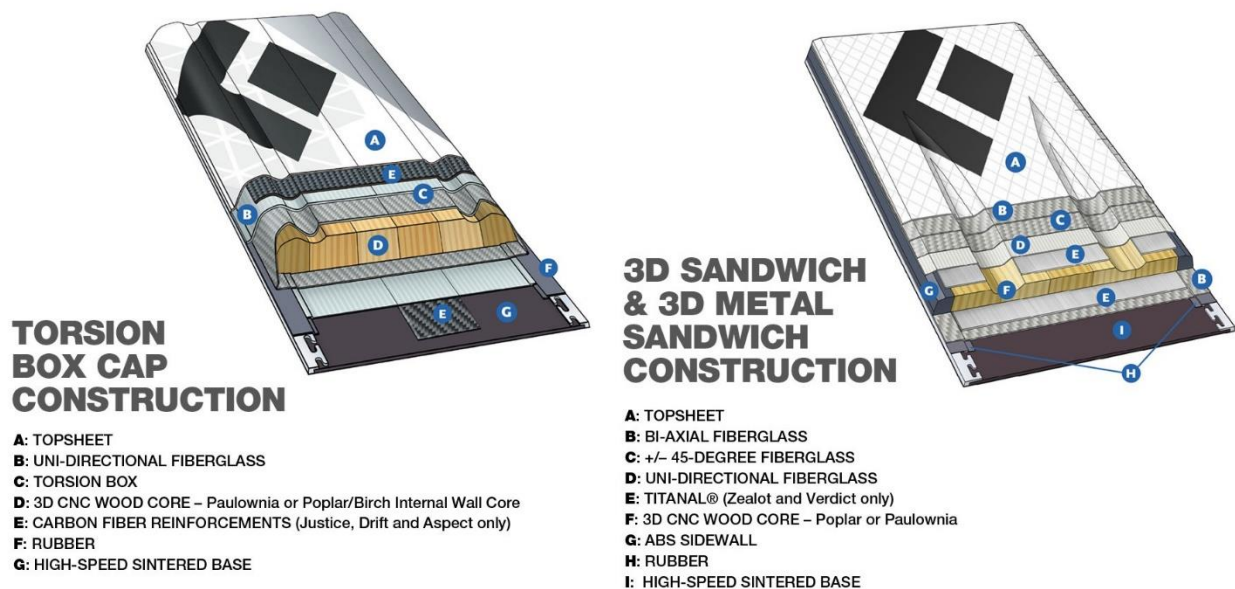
Cross-sections of typical cap and sandwich constructions. Pictures from [5].
